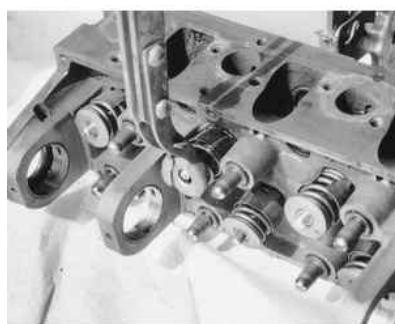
then the camshaft can be removed by sliding it out (shown), or unbolting a bearing cap (not shown)
